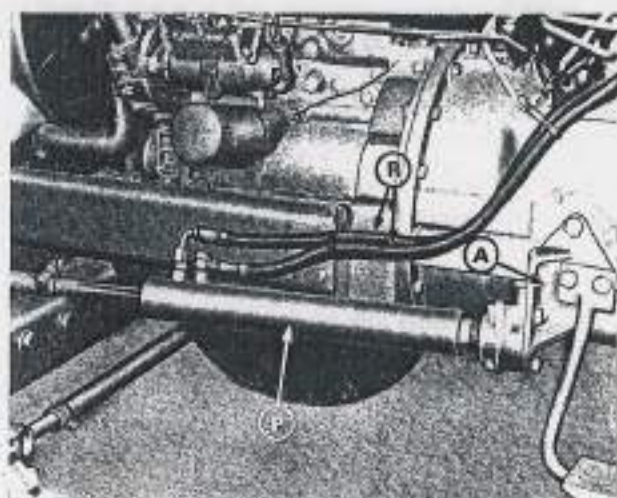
Location of the steering ram fitted to 350 Tractors
